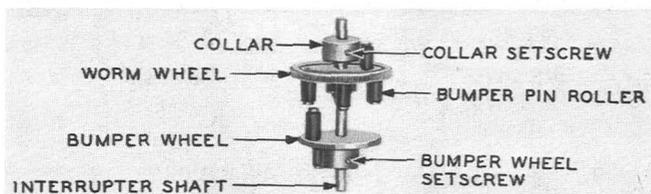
Interrupter Shaft Detail (Holtzer-Cabot Machines)
